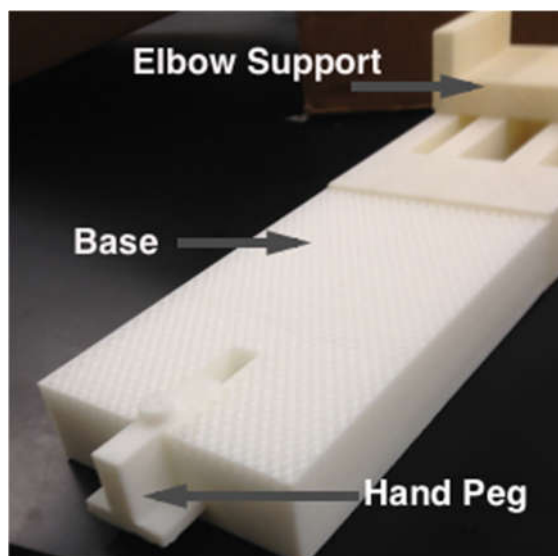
Image of the prototype for the tensile design that we built via 3D printing.
